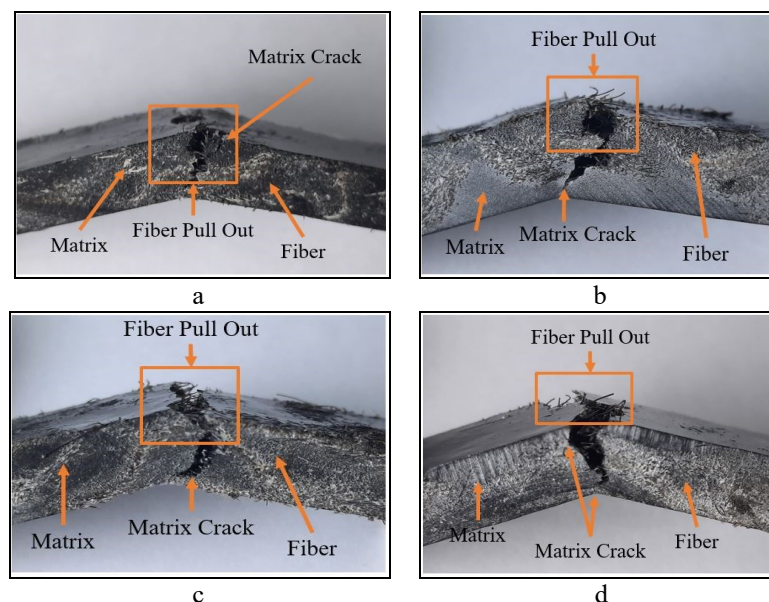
Hair composite tensile test fracture (a) 0°/90°; (b) 15°/105°; (c) 30°/120°; (d) 45°/135°
